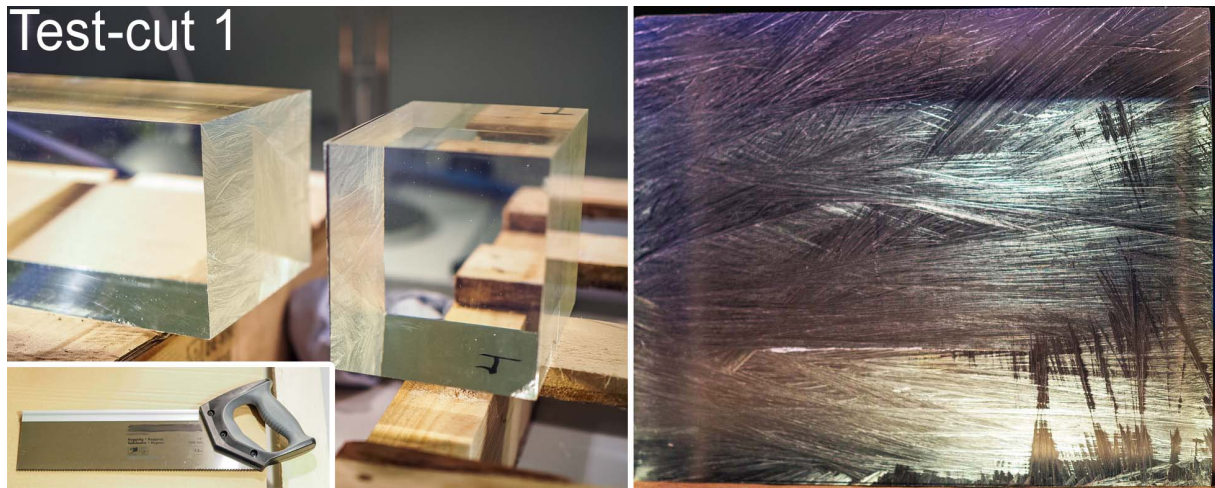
Scintillator Test-cut 1, performed using a 13 TPI handsaw. (left panel) the cut-off piece and (right panel) a close-up of the surface finish (right panel) for Test-cut 1 is shown. An image of the saw used to perform this cut is included in the bottom left panel corner.
